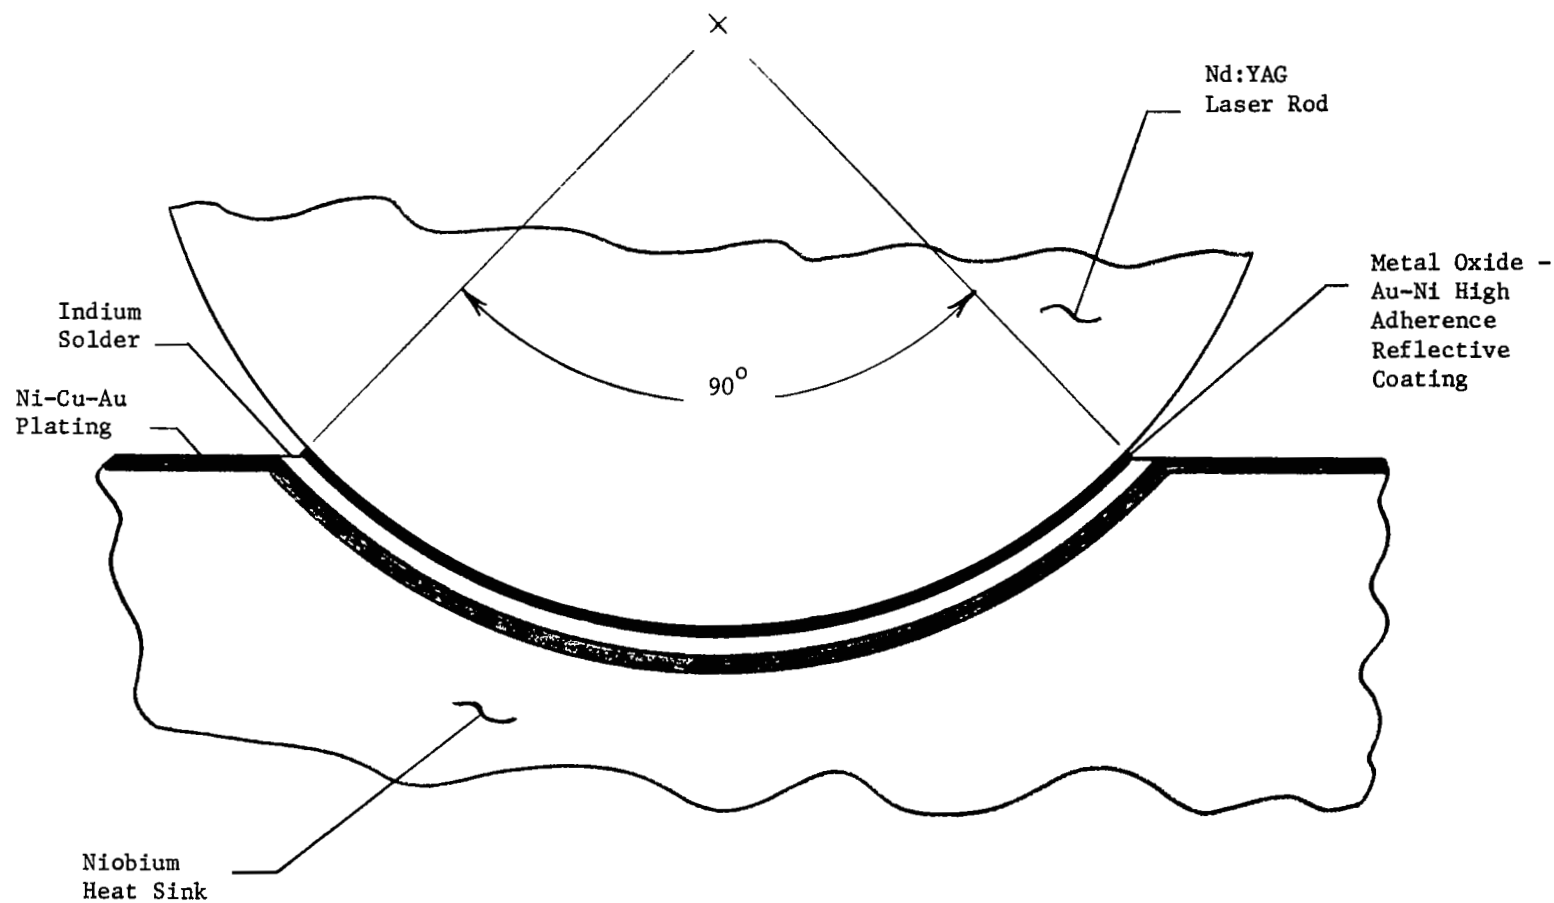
Conductively Cooled Nd:YAG Laser Rod Mounting Arrangement.
